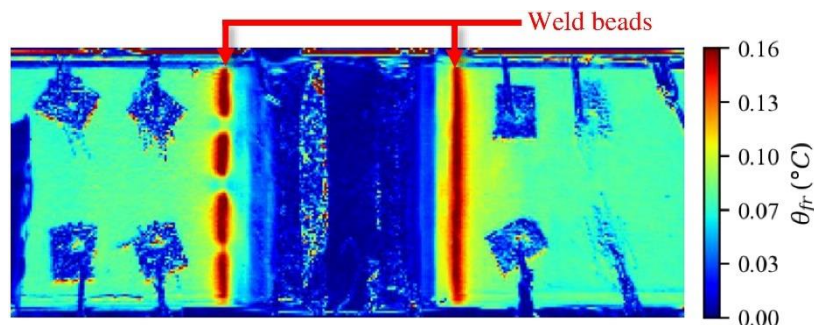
Image of a  $\theta_{fr}$  field on a welded joint at  $R=0.1$ ; three cracks are visible on the left weld bead
